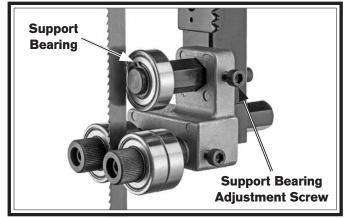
Upper support bearing assembly and controls (guide post cover removed for clarity).
